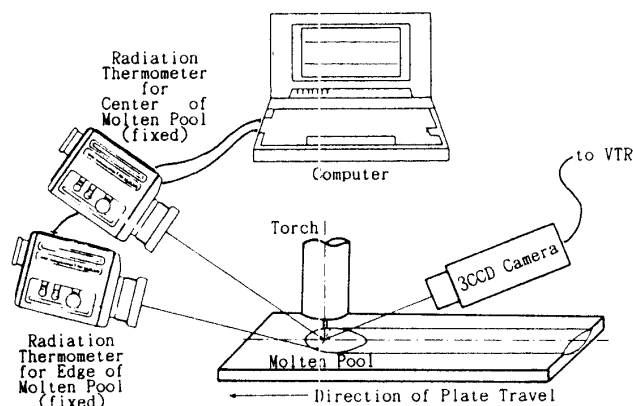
Schematic Illustration for Temperature Measurement Method of TIG weld Molten Pool Surface by Radiation Thermometer with fixed Focus.
